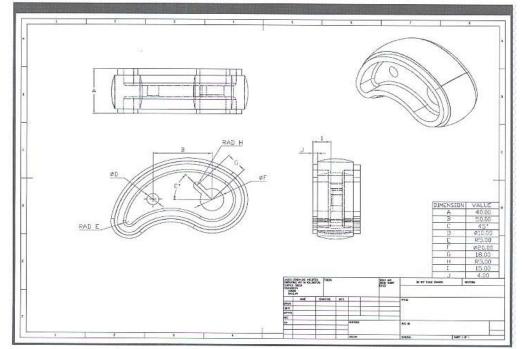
show the component Specification. The figure obtained from the assignment handout.
